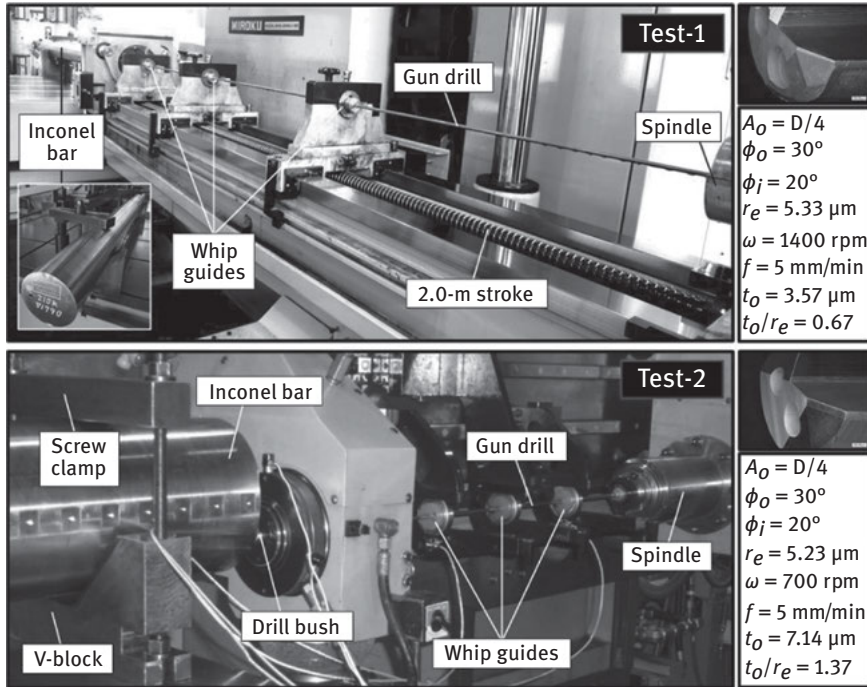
Experimental setup, drilling conditions and tool geometries [1].
